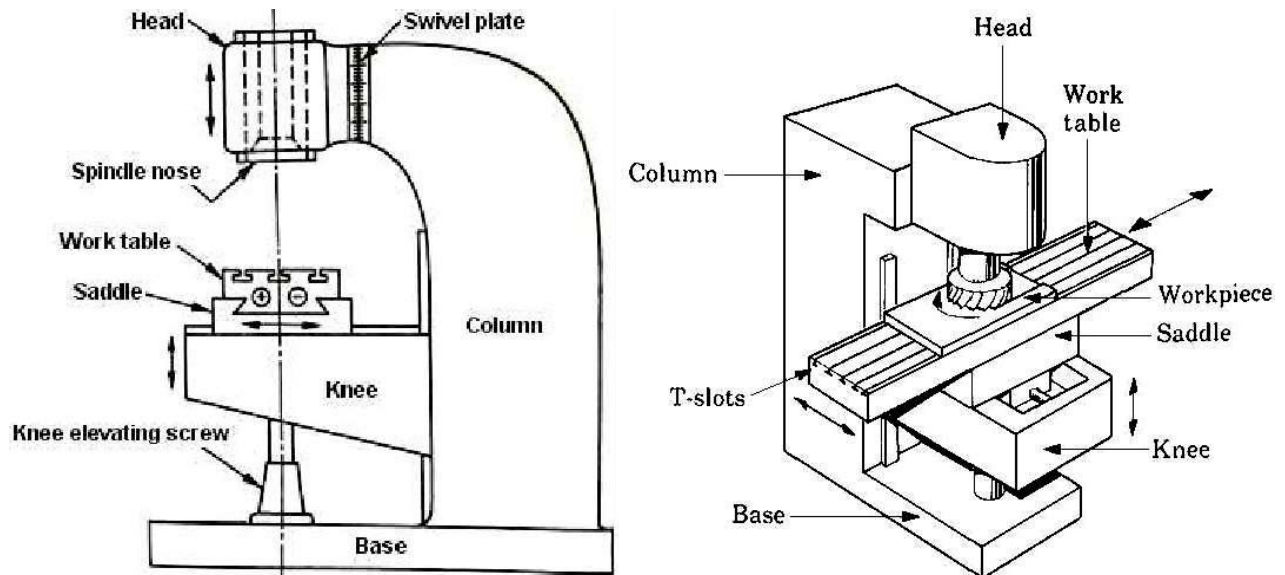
schematically shows the basic configuration of a vertical milling machine.
